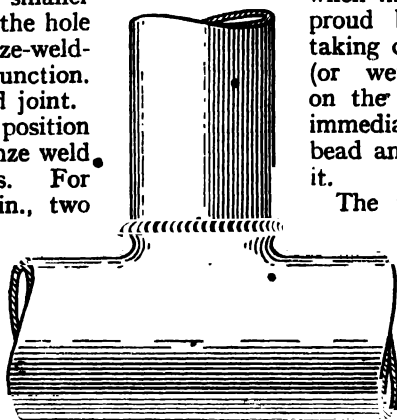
Appearance of bronze-weld on branch joint to larger diameter water service pipe. Compare weld of Fig. 11 on smaller pipe.
